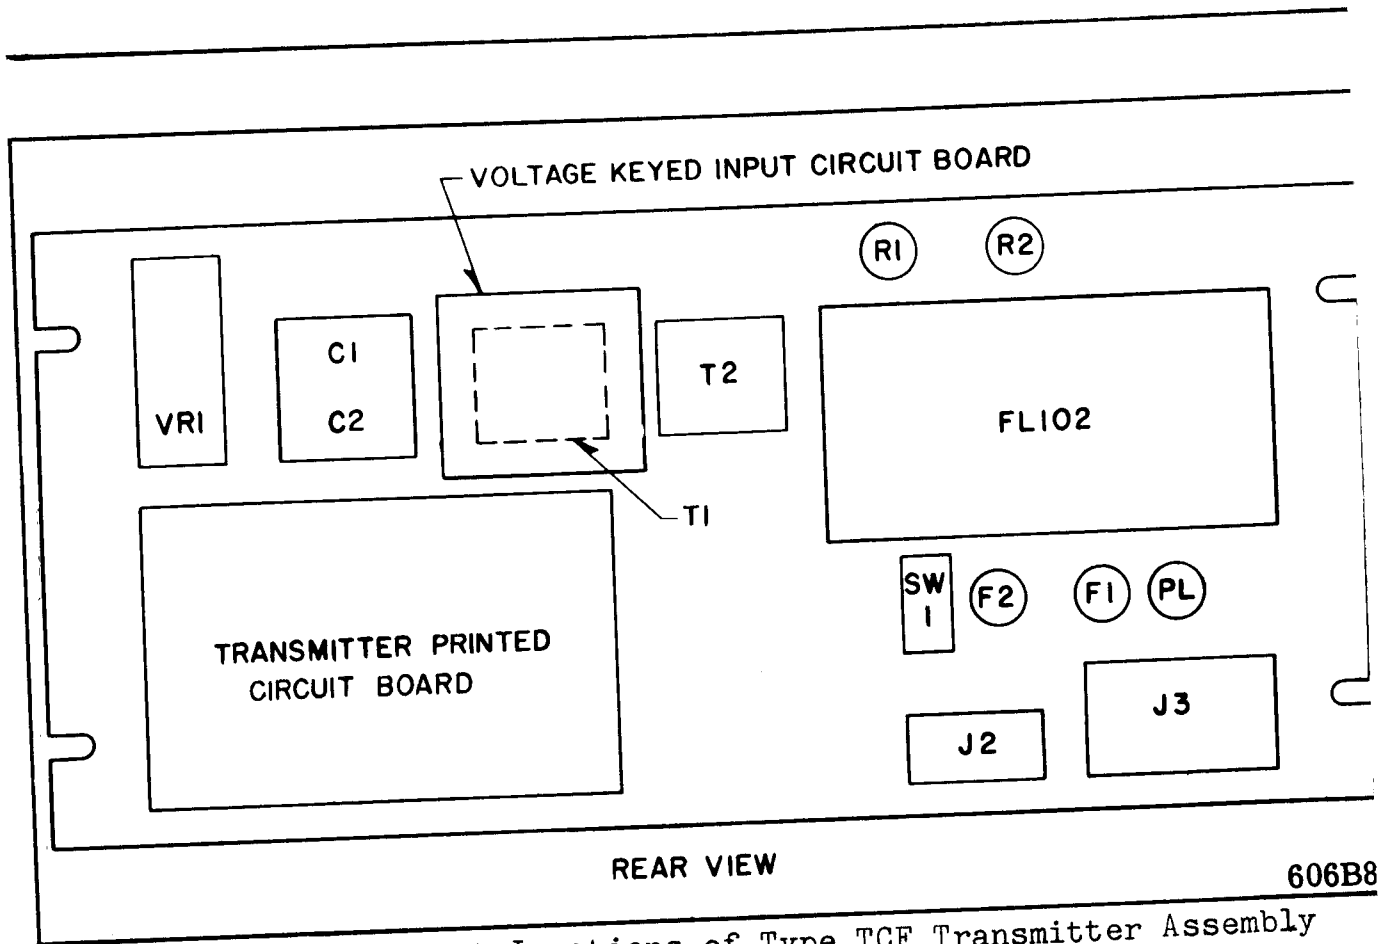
Component Locations of Type TCF Transmitter Assembly
